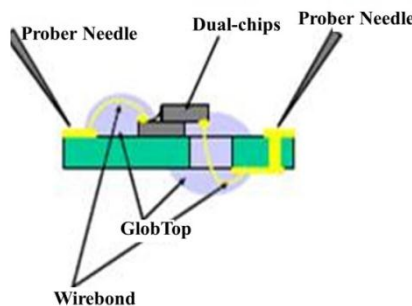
Concept of wire bonded assembly of 3D Die-to-Die stack indicating prober needles for testing purpose
